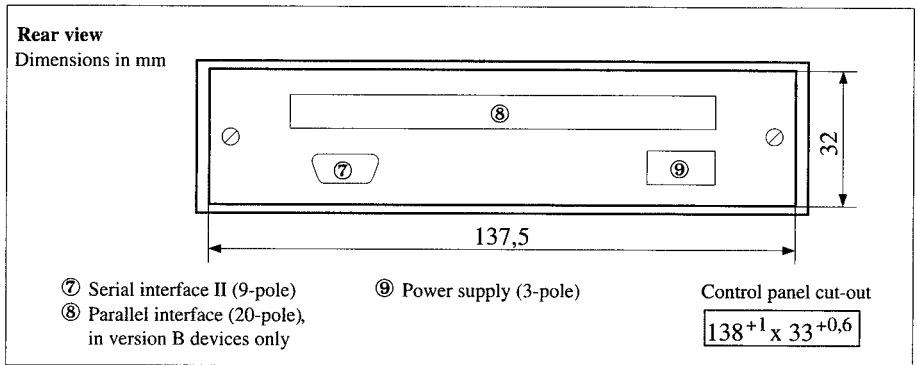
DAA 144-120 mounting dimensions, rear view
